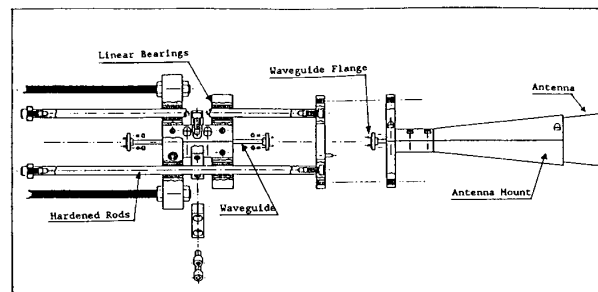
Millimeter alignment fixture with matching antenna mount.
